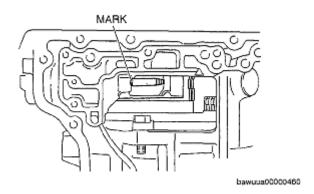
Identifying Mark On Piston Rod Courtesy of MAZDA MOTORS CORP.
